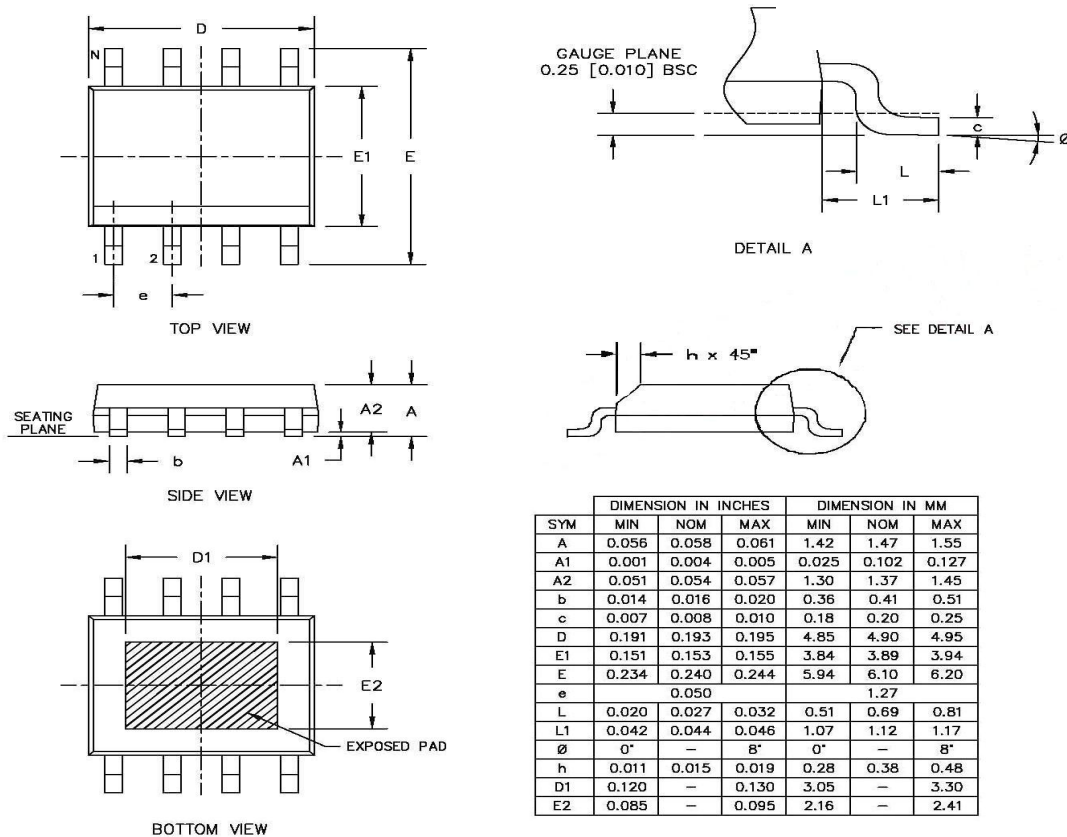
Mechanical Outline - 8L EP SOIC (Exposed Pad)
